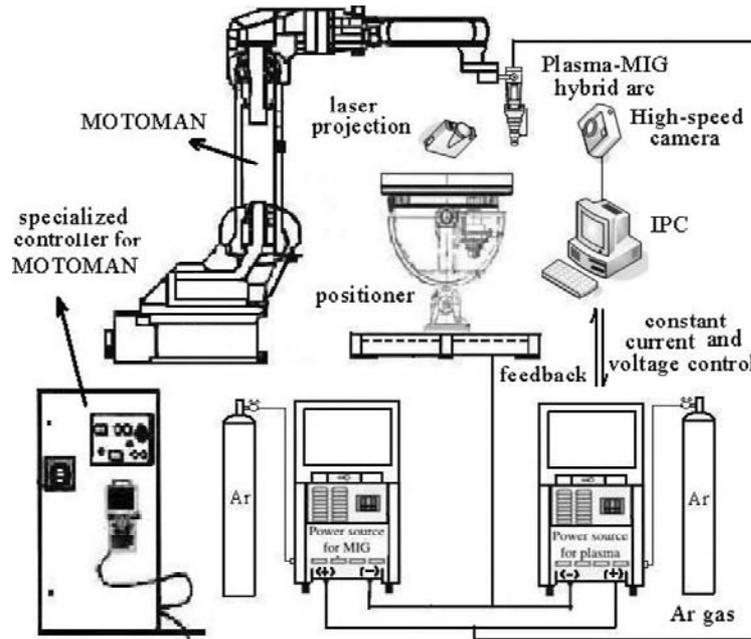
Rapid prototyping system of Plasma-MIG welding.
